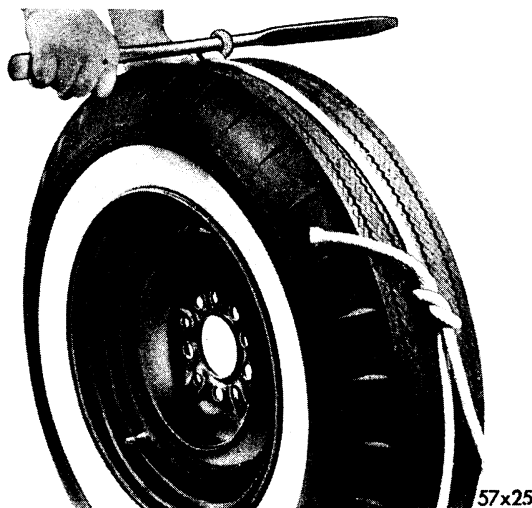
Constricting Centerline of Tire with Rope Tourniquet
